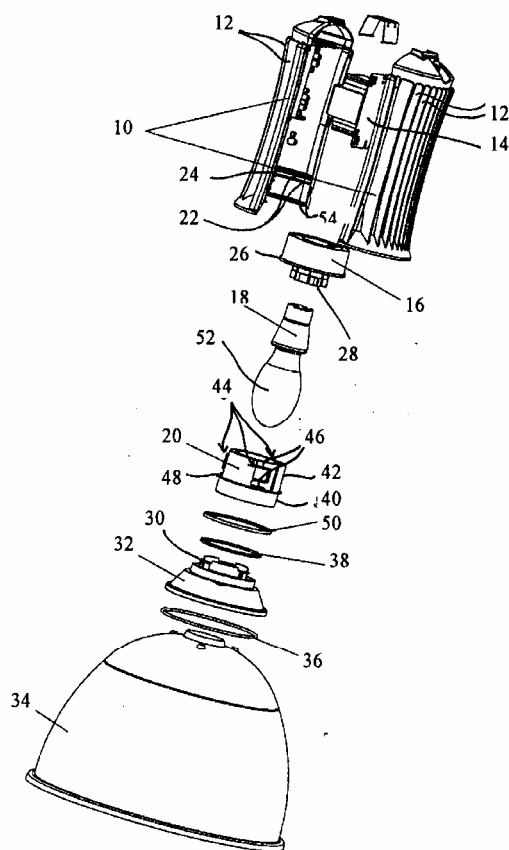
Exploded view of the industrial luminaire: 10 – Housing half-shells, 12 – Cooling fins, 14 – Ballast unit, 16 – Adjustment element-housing side, 18 – Illuminant socket, 20 – Adjustment element-reflector side, 22 – Ridges, 24 – Groove, 26 – Flange, 28 – Adapter, 30 – Bayonet lock, 32 – Reflector holder, 34 – Reflector, 36 – Sealing ring, 38 – Sealing ring, 40 – Section, 42 – Section, 44 – Guiding pieces, 46 – Legs, 48 – Flange, 50 – Sealing ring, 52 – Illuminant, 54 – Stop, 56 – Groove
